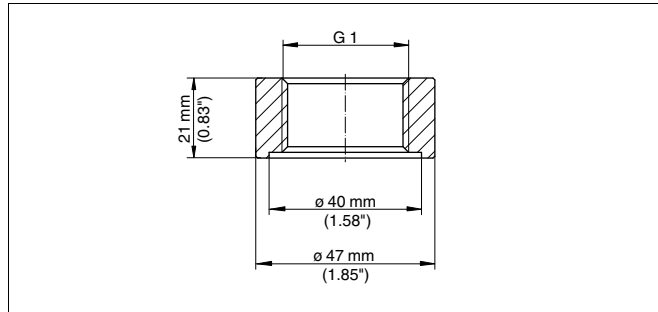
Dimensions welded socket G1 A acc. to DIN 3852-X
